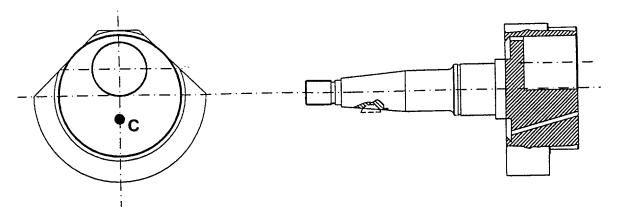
Main shaft with the eccentric hole where the planet pin is inserted.
